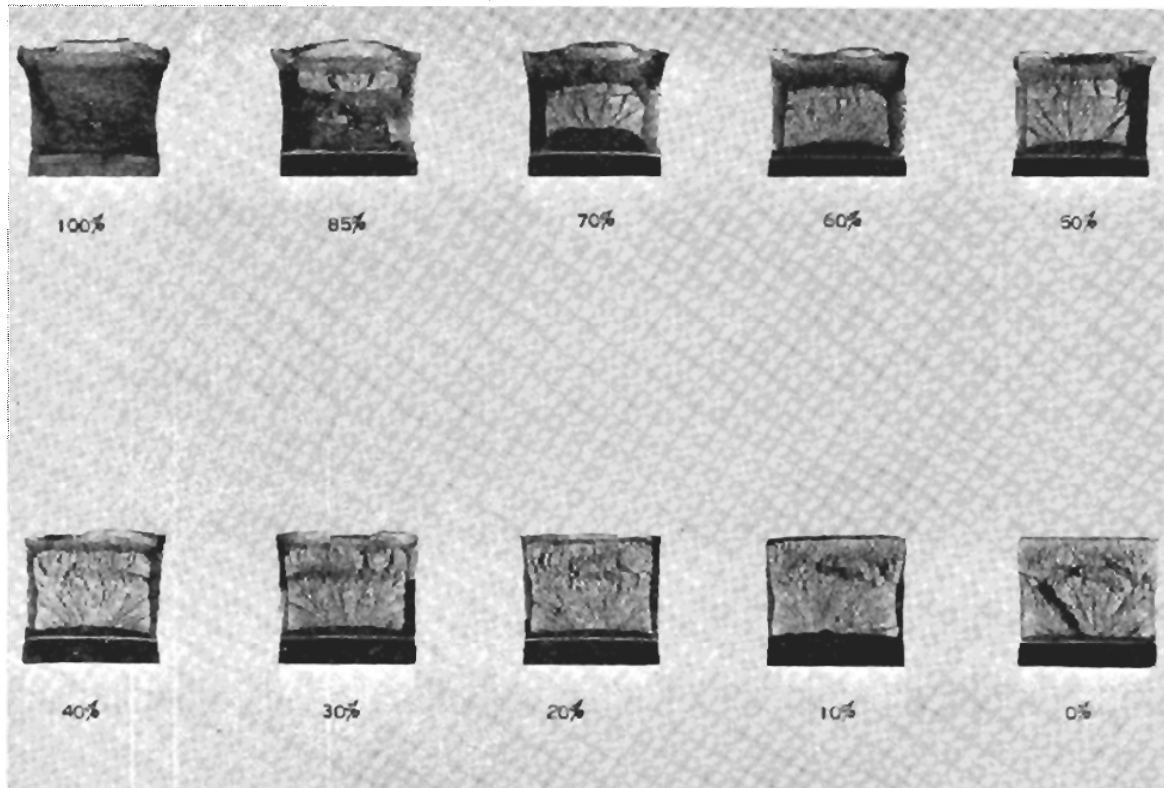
Fracture Appearance Charts and percent Shear Fracture Comparator.
